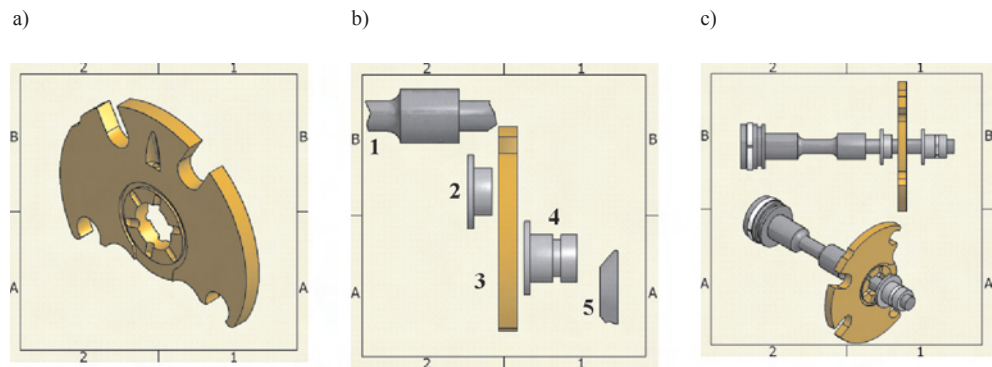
Axial slide bearing: a) bearing disc, b) bearing parts: 1 – shaft journal, 2 – bearing pin on the side of the turbine, 3 – bearing disc, 4 – the pin on the side of the compressor, 5 – cylindrical part of the compressor impeller, c) view of the assembled bearing set
